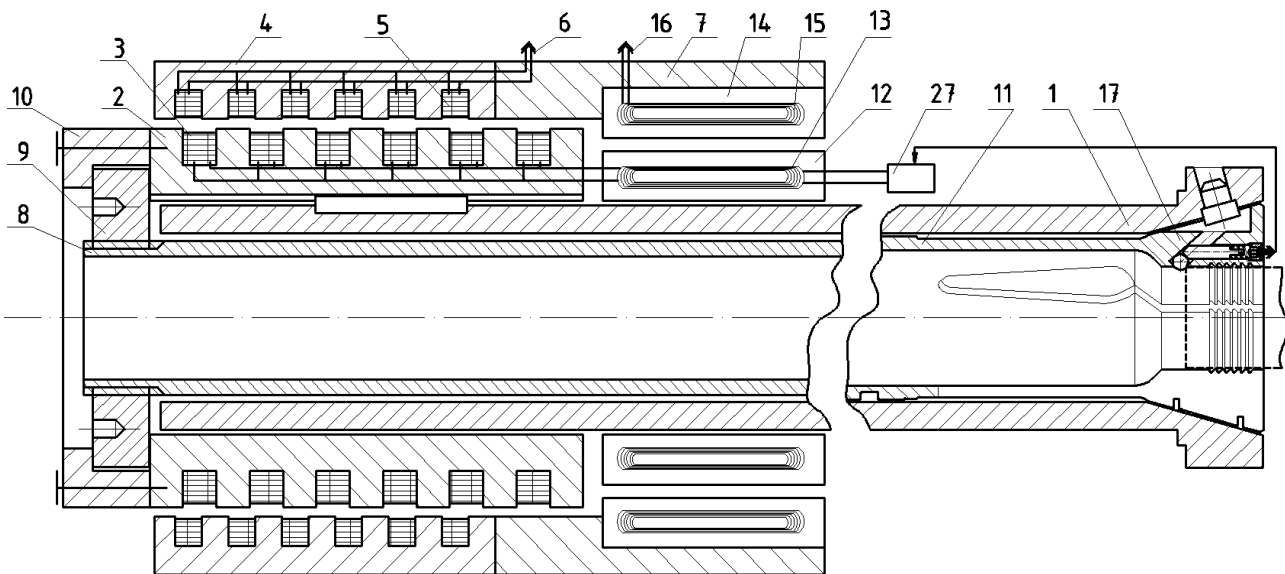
Clamping mechanism with electric actuator for machine tool spindles
